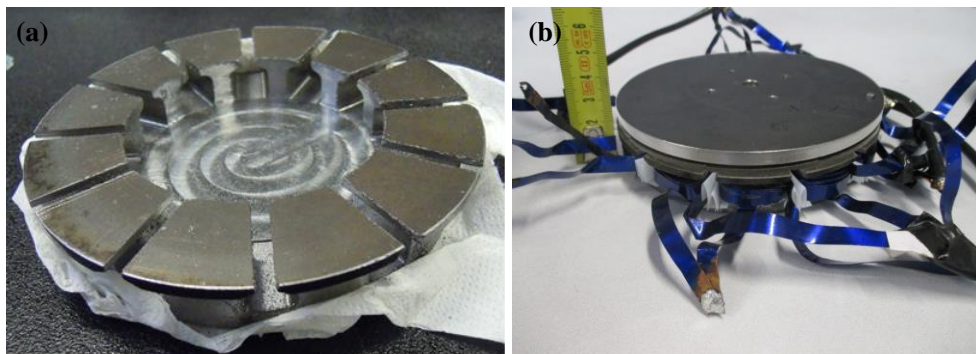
AFM stator (a) and final dimension of the prototype (b)
